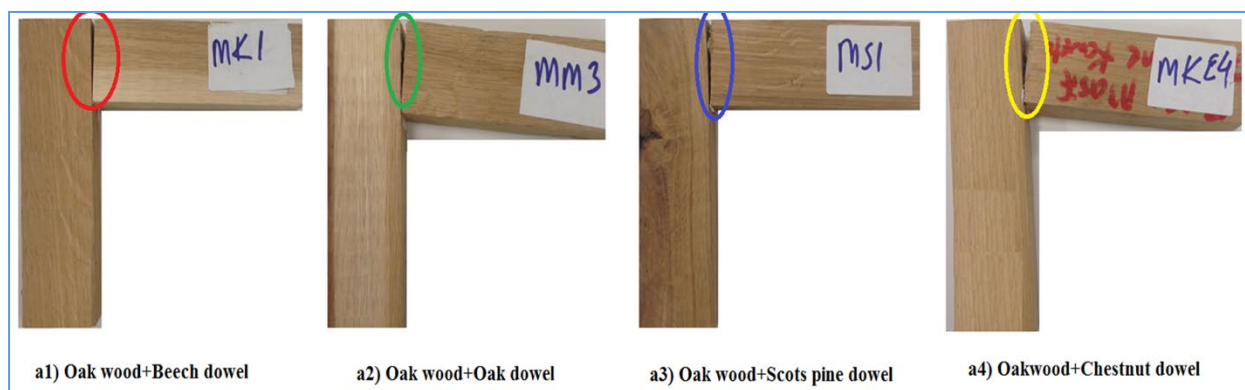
Mode of L-shaped, two pins dowel joint failure not reinforced
